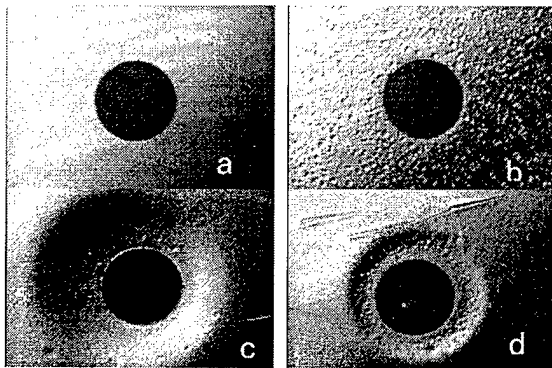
Images from a microscope showing: a) good ferrule surface b) ferrule surface with holes c) e d) ferrule surfaces deformed
